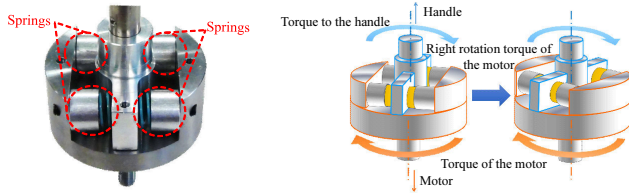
The photo shows the modified spring mechanism. It has four small springs arranged in the horizontal plane. Fig. 6. The schematic figure depicts the spring mechanism. The motor torque is transmitted through the mechanism with elastic deformation of the small springs.
